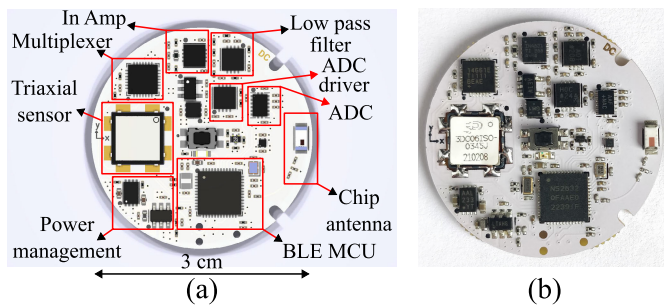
(a) Rendering of wireless sensor PCB design with main components labeled. (b) Assembled wireless sensor node PCB.
